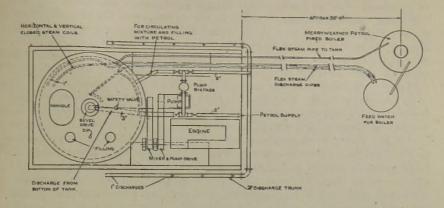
MOBILE MIXING PLANT - GENERAL LAYOUT
